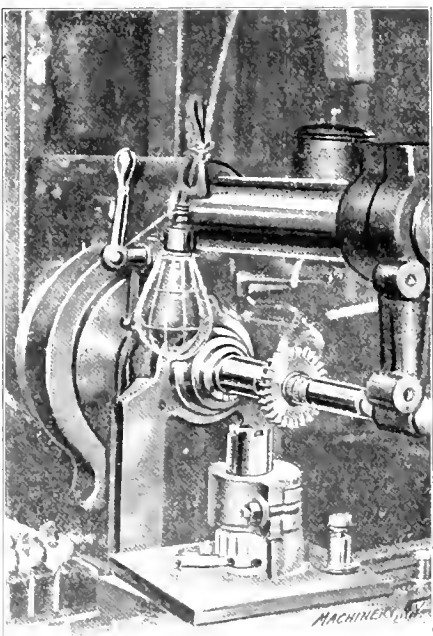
Milling Clutch Teeth in the Drive-shaft End of the Sleeve
